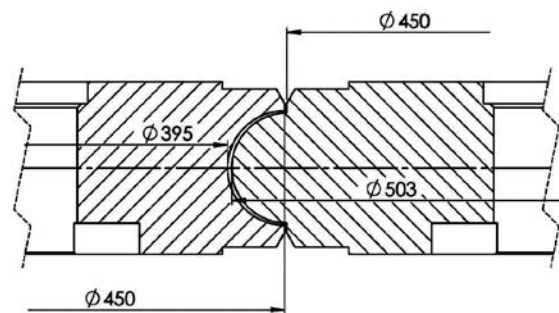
Cross-section view of a couple of 450 mm diameter moulding rings going through the axes of both rollers
